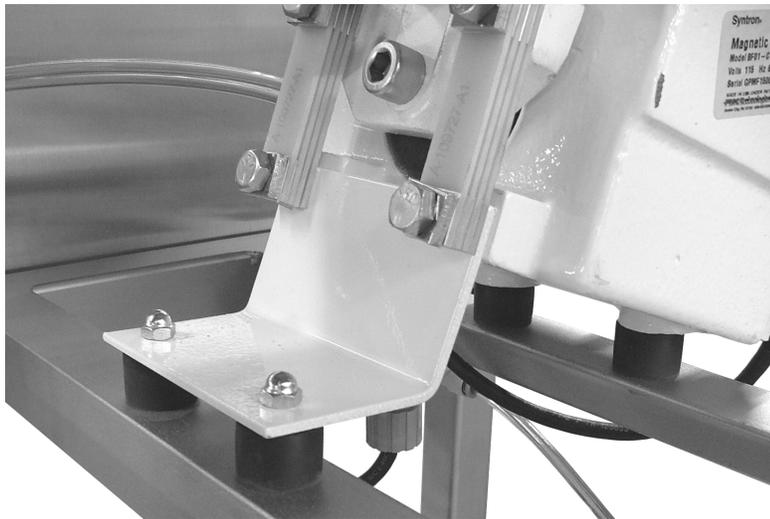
Vibrator Pan Feeder Front Mounting Nuts
